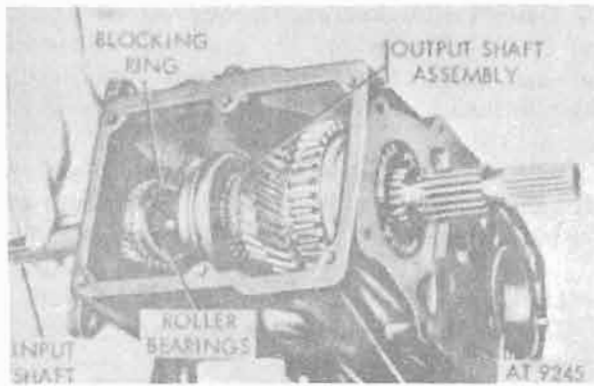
Installing front synchronizer blocking ring and input shaft assembly.
